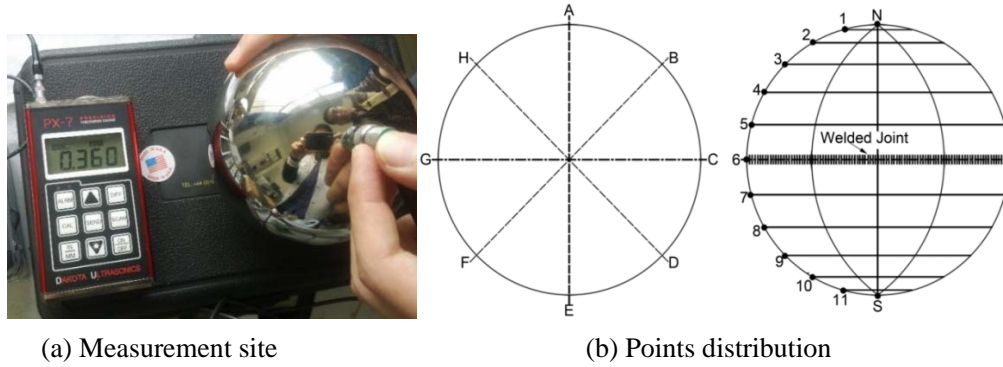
Measurement site and typical distribution of testing points for wall thickness
